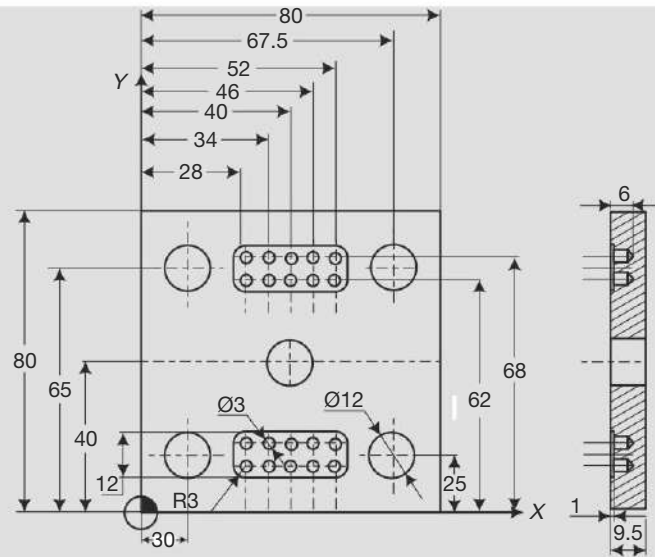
Part drawing shown with cutter for Example 13.11
